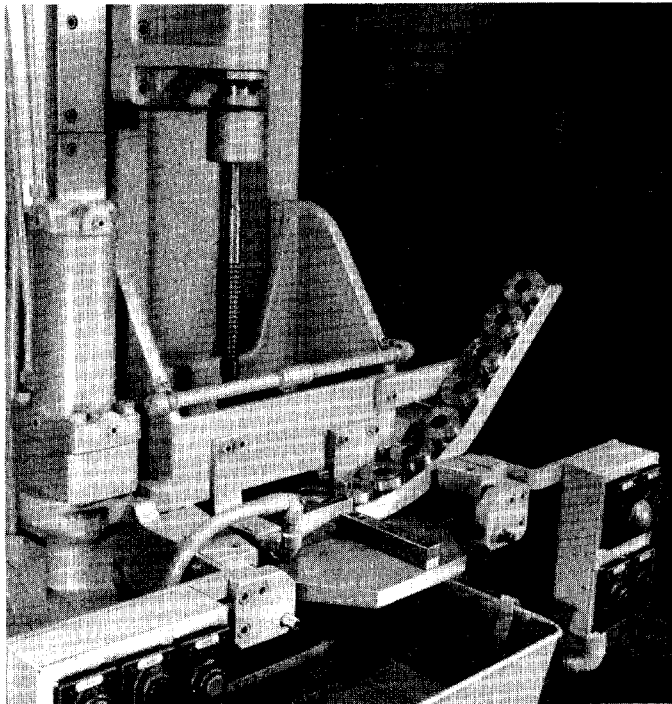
Work is moving into position on modern broaching machine. (Sunstrand Corp.)
